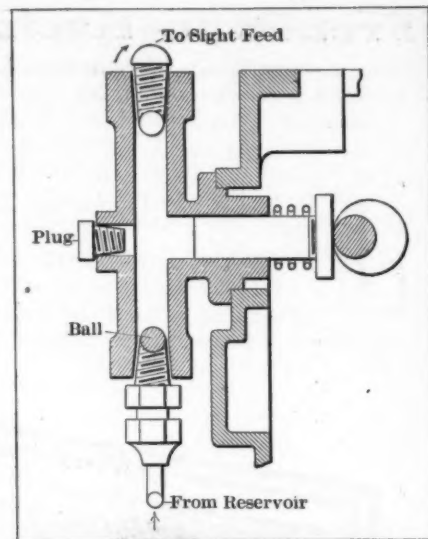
Sectional view of the plunger pump used on the Hudson "33," showing the two ball check valves
